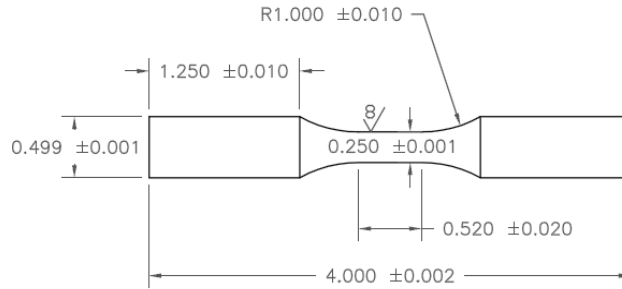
Smooth Specimen Geometry,  $k_t=1$ . Dimensions are in inches.
